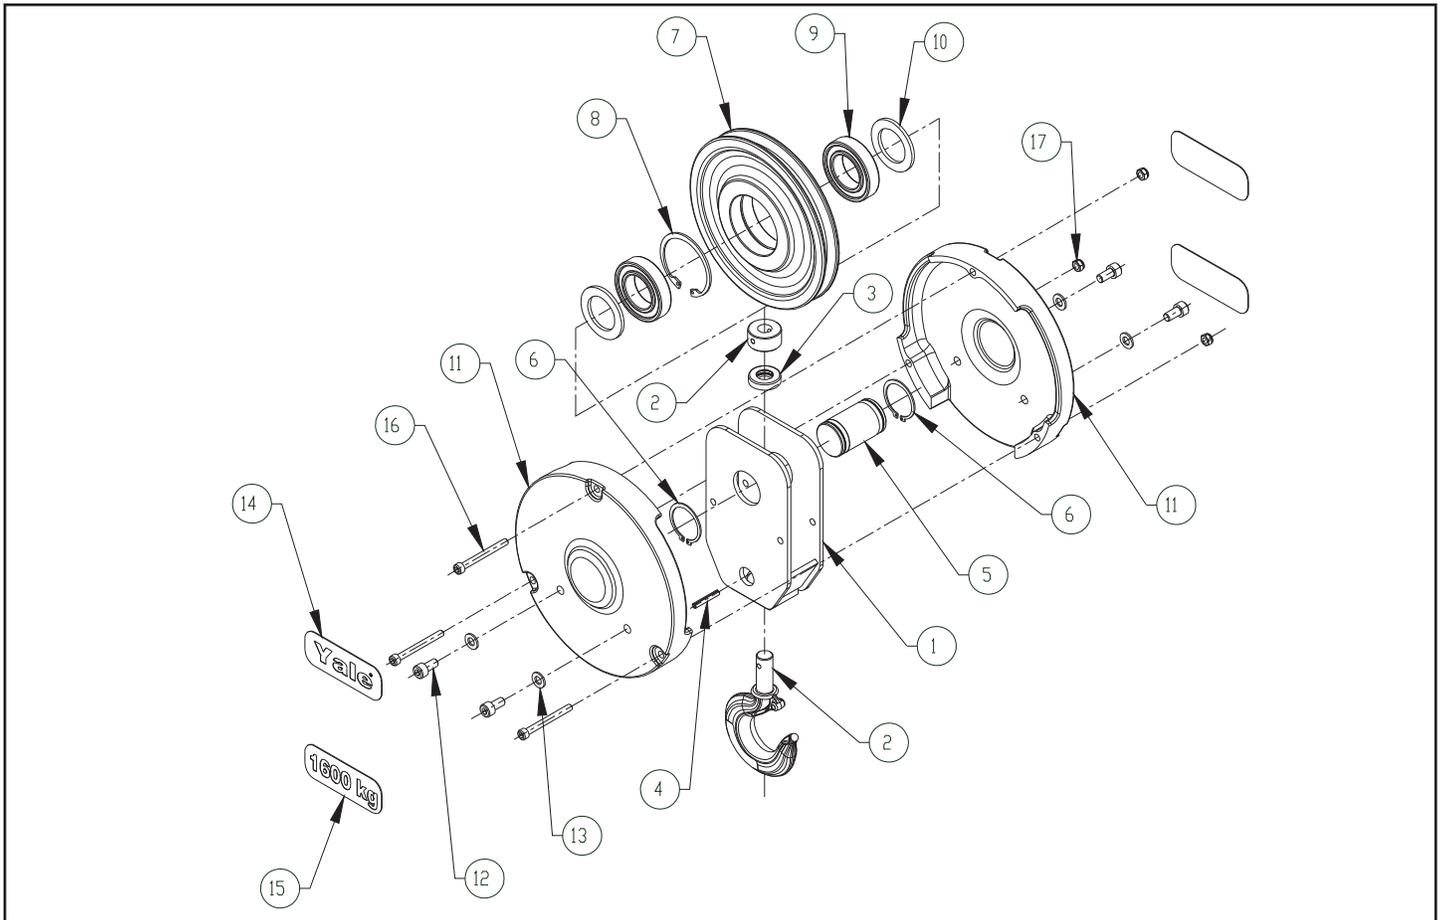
Lower Block Assembly (S2 Reeved)
